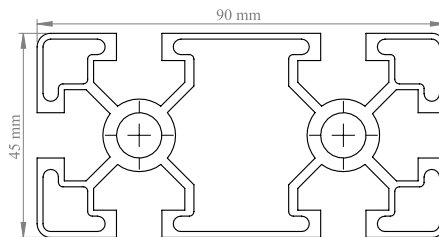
Cross-section profile of the 45 x 90 mm aluminum structural beam.
